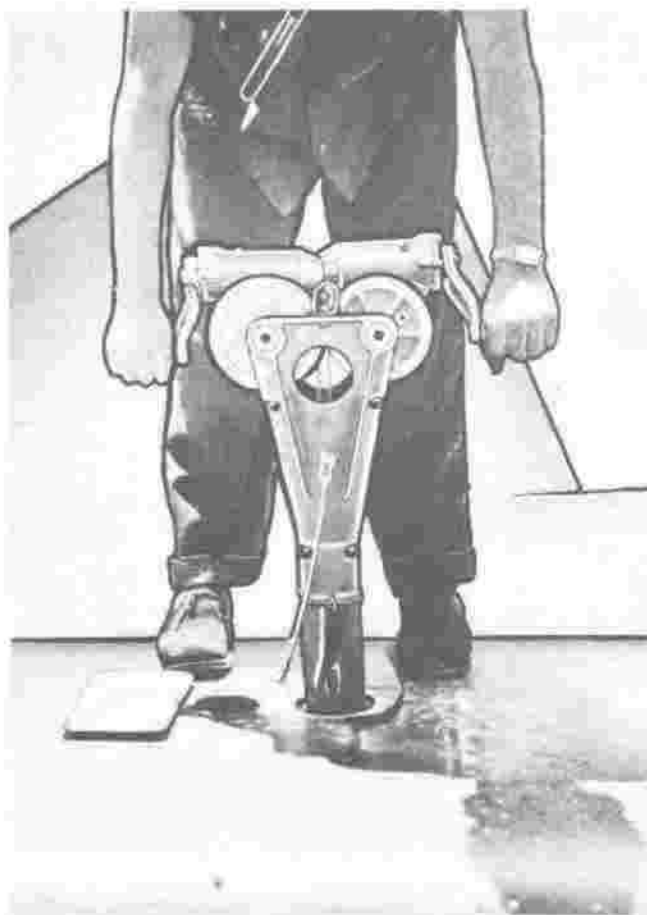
Bomb Hoist Assembly Installed on Fuselage Deck
